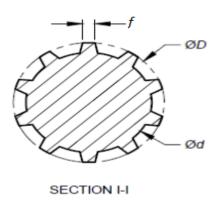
Dimensions (Grooved and Twisted Concrete Nails)
